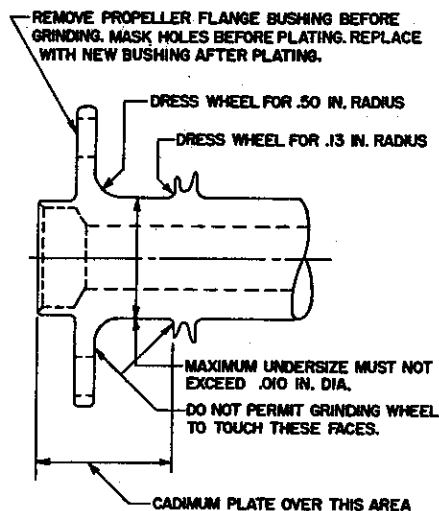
Reconditioning Crankshaft Oil Seal Surface
